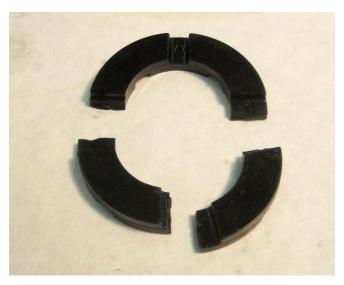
SN719 Turbine Housing Support Bushing/Thrust Washer
